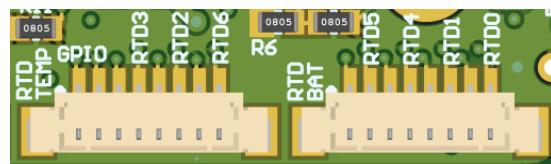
RTDs PicoBlade connectors on the PCB.
